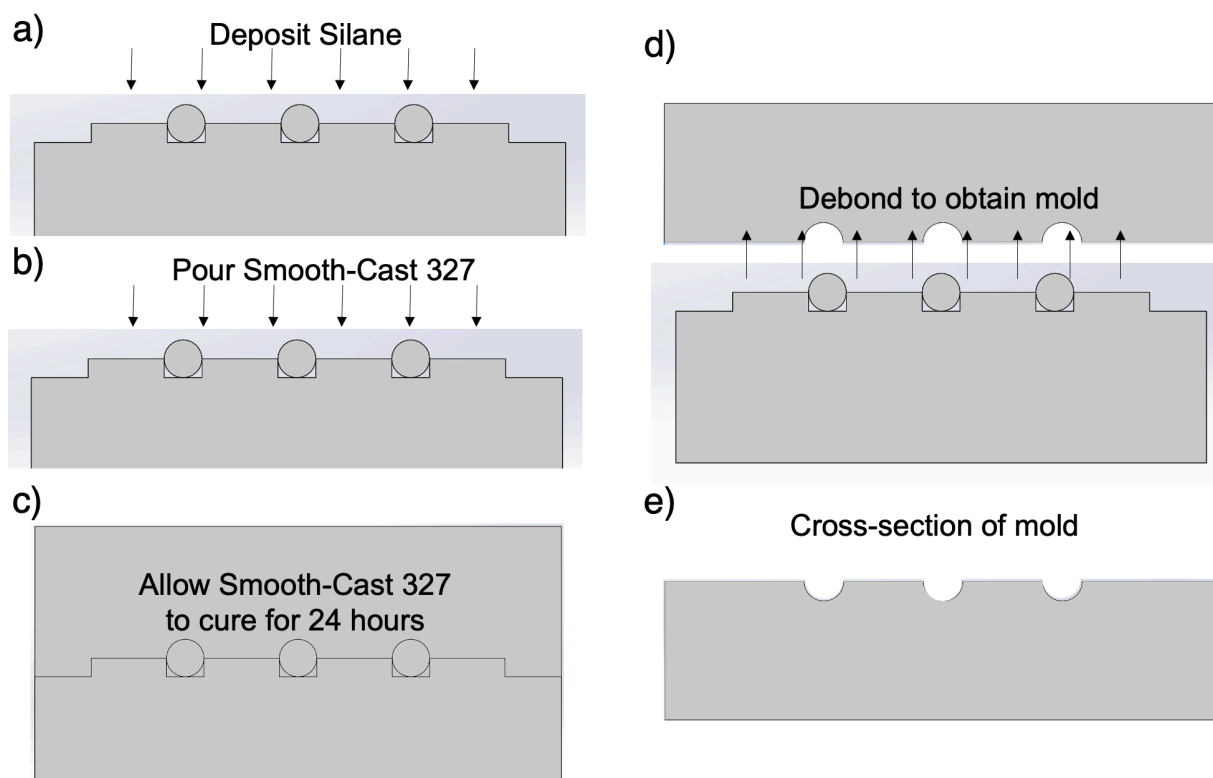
Illustration of mold formation process. a) Silane was deposited via CVD on the assembly, b) Smooth-Cast[®] 327 was poured over the assembly and allowed to cure for 24 hours. c) Upon curing d) de-bonded to obtain e) the mold.
